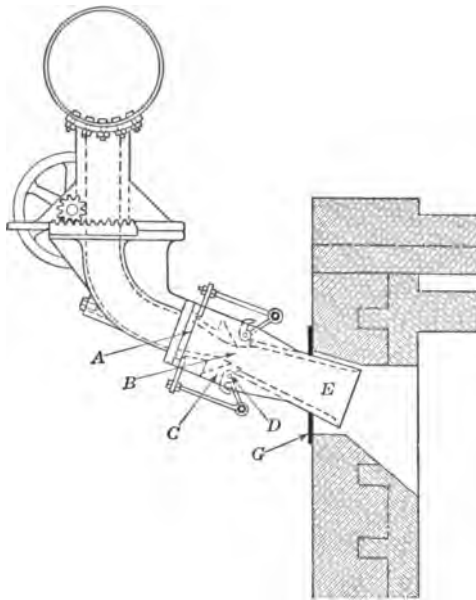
CUT THROUGH BRADSHAW BOILER BURNER.
